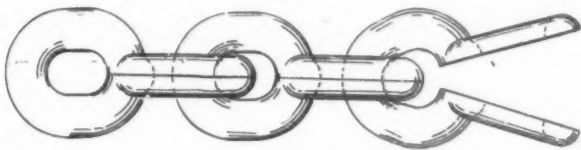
A Section of Weldless Chain Showing How It Is Assembled.
